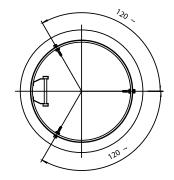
| Lifting with 3 attachment points, 120° angle in between
